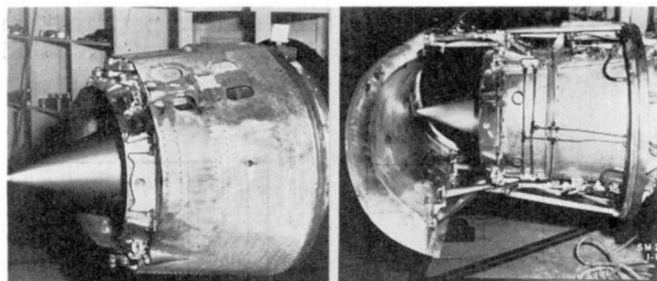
Adjustable-type suppressor with thrust brake in forward and braking positions
